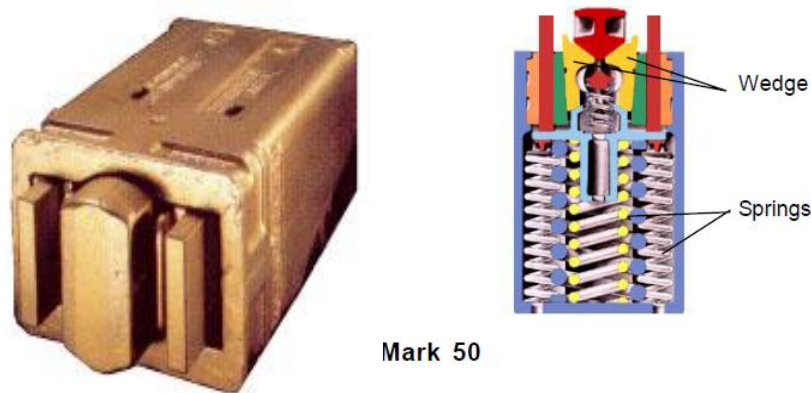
Cardwell Westinghouse Mark 50 Draft Gear [35]
